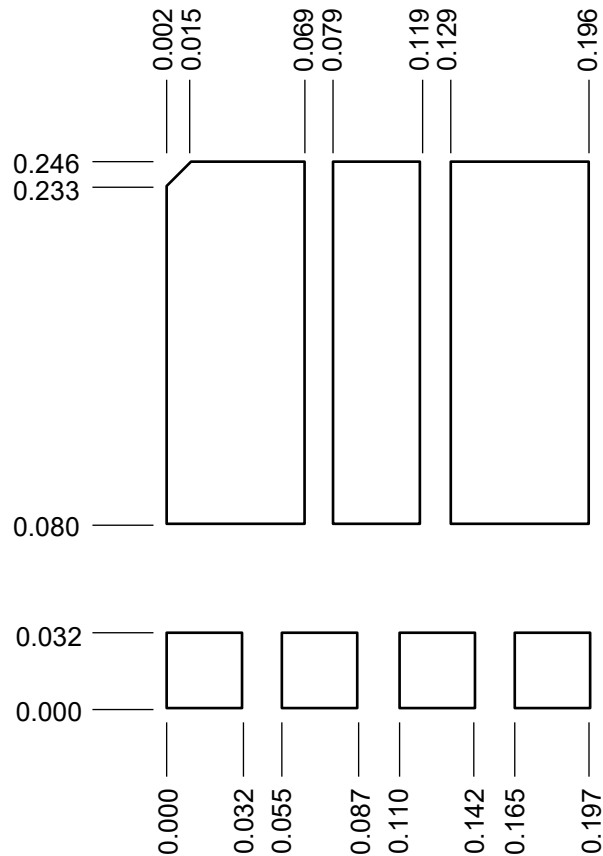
Recommended PCB Solder Pad Configuration (Top View)
